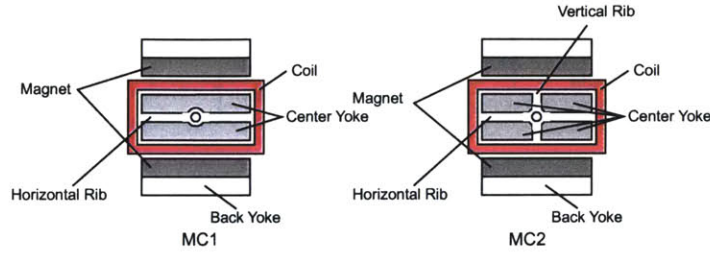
Cross section of voice coil motor (adapted from [64]).
